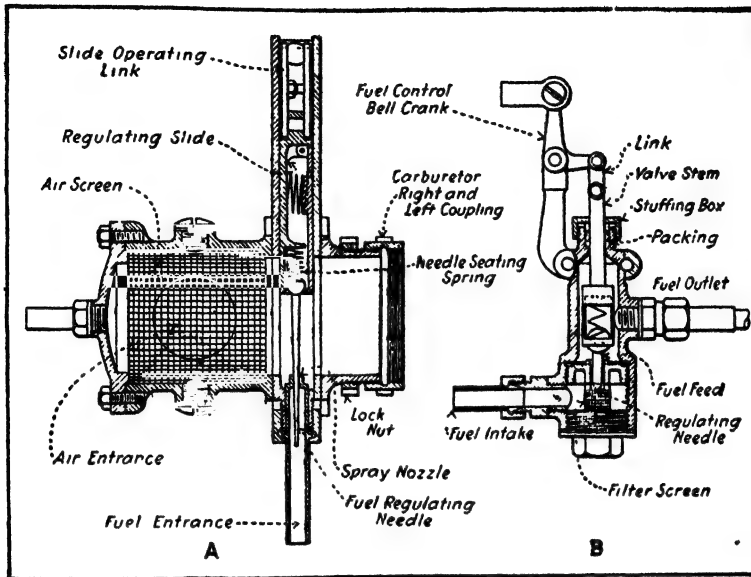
The LeRhône Carburetor at A, and Fuel Supply Regulation Devices at B.
